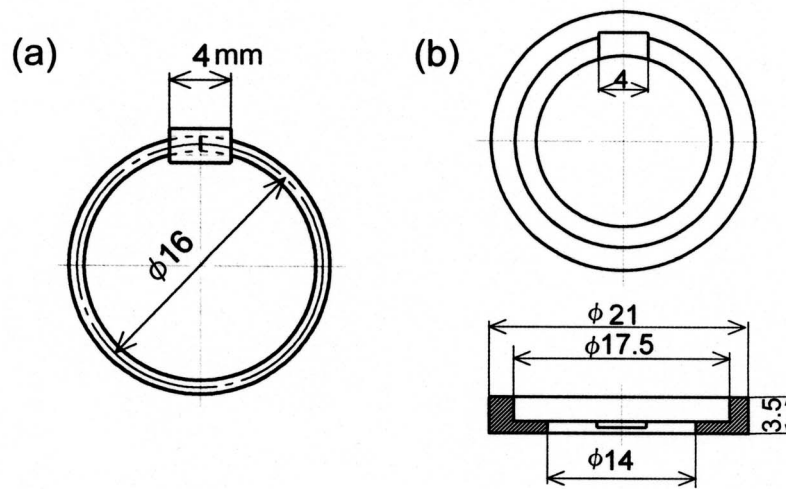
(a) A top view schematically illustrating a PTFE ring-shaped container. (b) Top and cross-sectional views schematically illustrating a PTFE holding jig.
